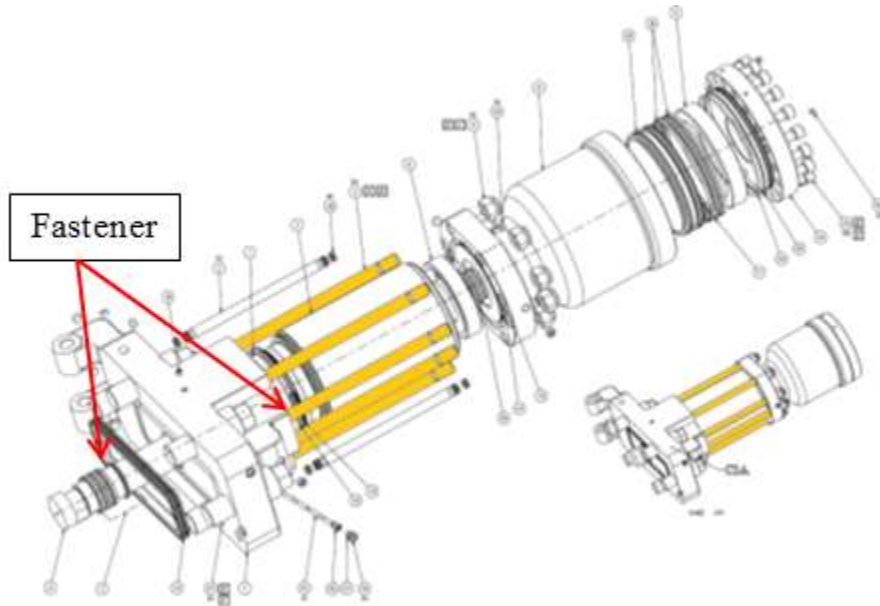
BLIND SHEAR RAM ASSEMBLY WITH FASTENERS HIGHLIGHTED (OEM RCA)
